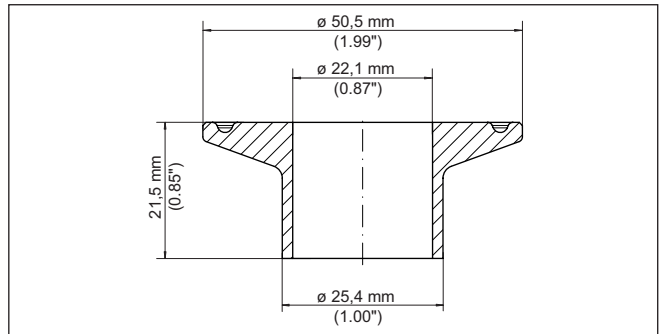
Dimensions of welded socket, Clamp 1" (DIN 32676, ISO 2852)
